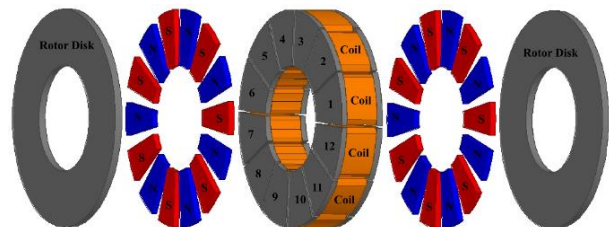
Exploded perspective of investigated YASA-AFPM machine
